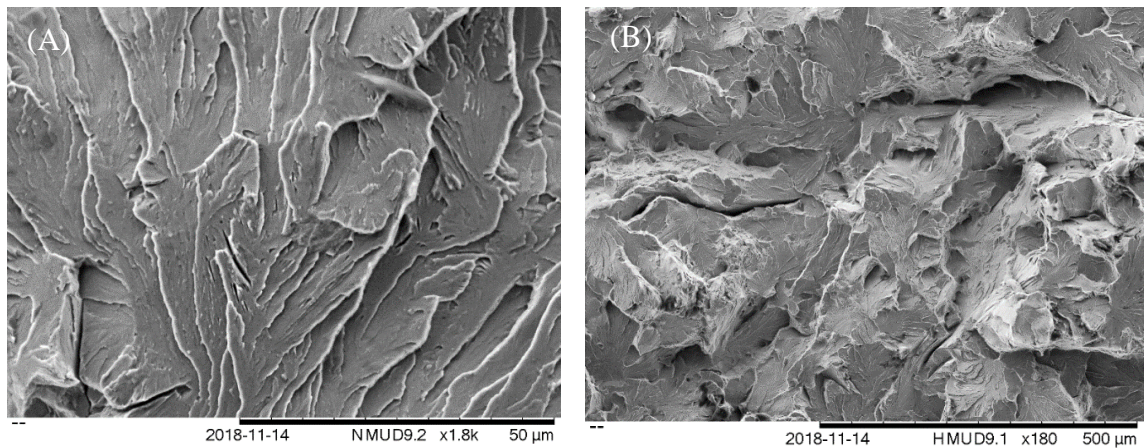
A cleavage process causes a river pattern of radiating lines, typical of a brittle fracture mechanism (A). In addition, there were transgranular and intergranular fractures in this area, suggesting that the environment had contributed to its failure (B).
